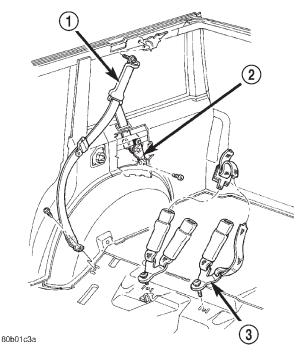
Rear Seat Shoulder/Lap Belts and Buckles
